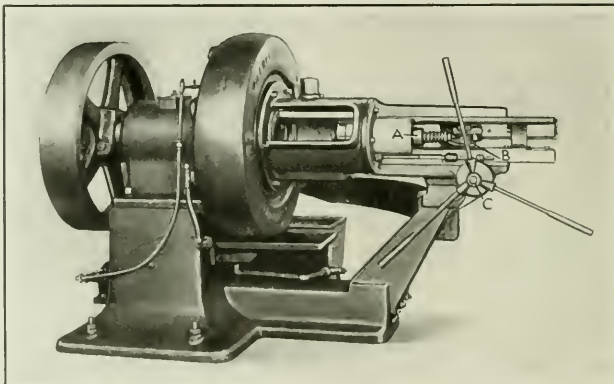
Swaging Machine with Hand Feed and Compressed Air Work-holder
